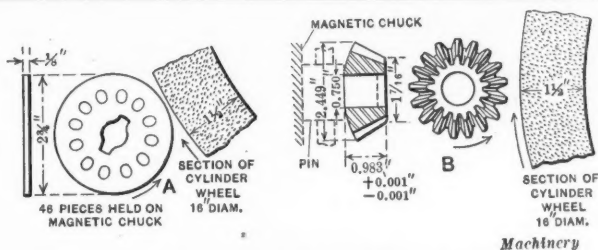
Examples of Meat Chopper Disk and Bevel Pinion Surface Grinding
